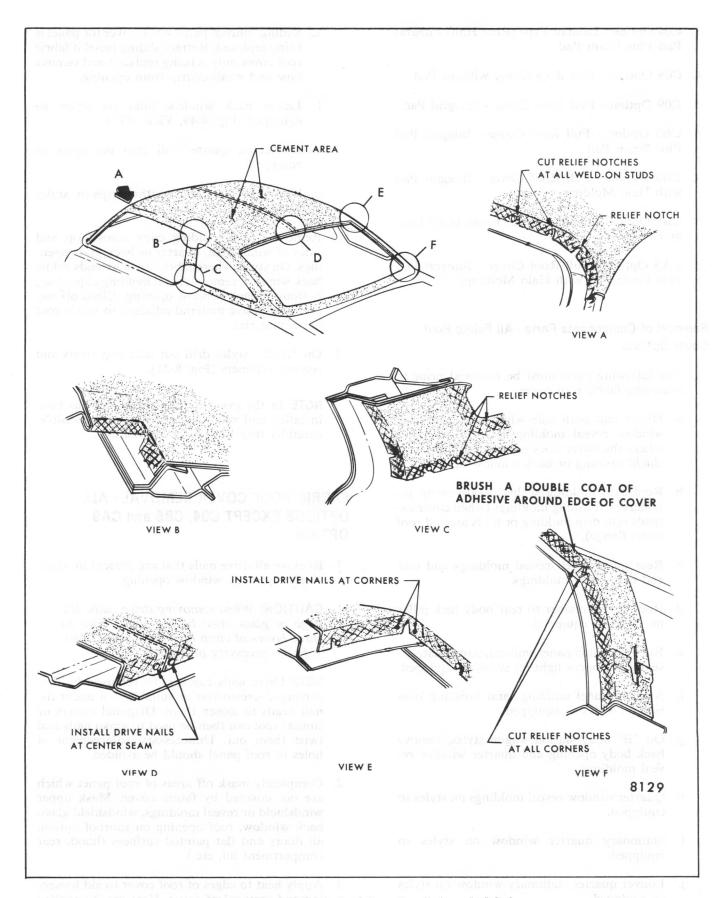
Typical Fabric Roof Cover Installation - "A" Styles
